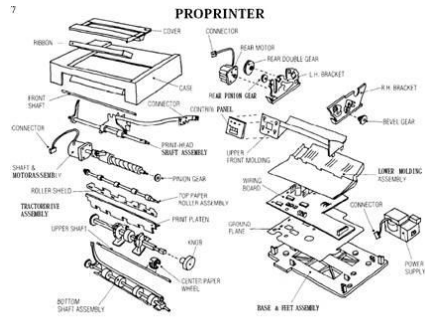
Exploded view of IBM Proprinter highlights design simplification in this product.
